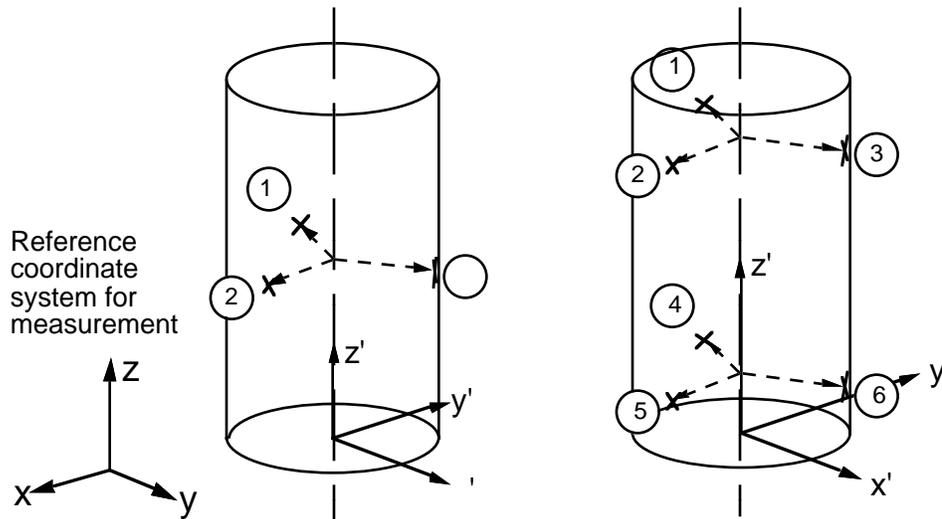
(a) Positional inspection of a hole (b) Positional inspection of a tall, thin hole
